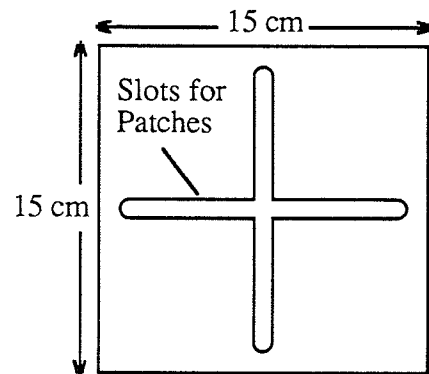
Construction of ground plane showing slots used to secure the patches.
